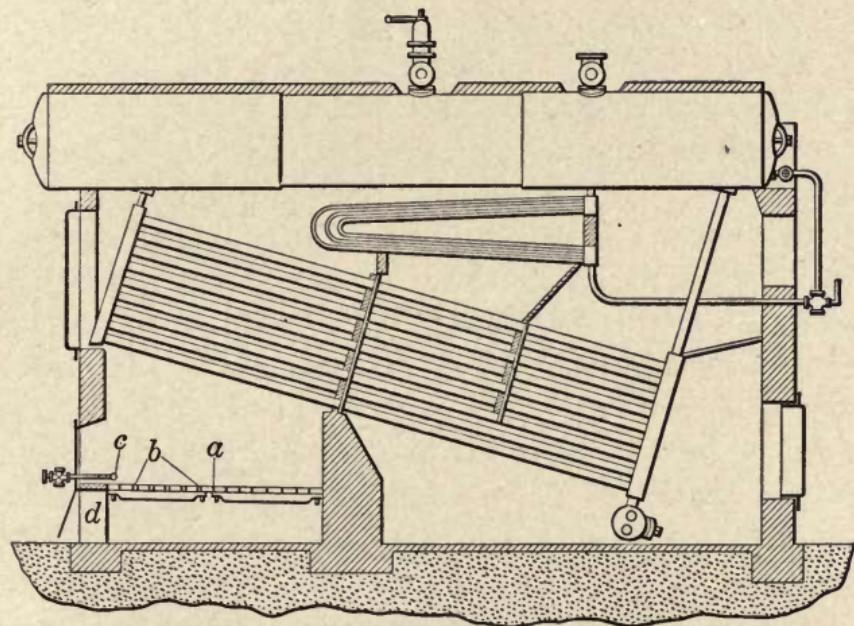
Babcock & Wilcox boiler with burner at front.
